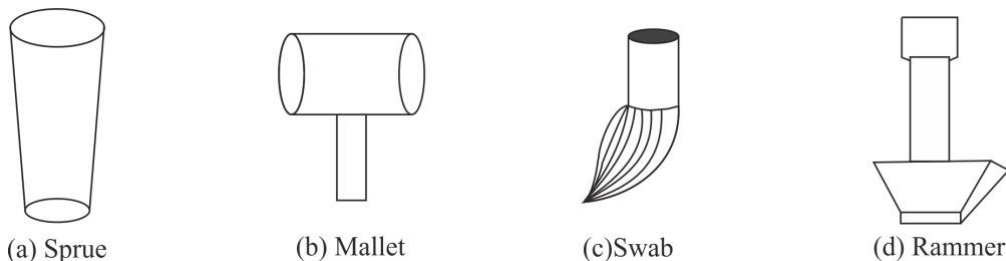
Moulding tools: sprue; mallet; swab and rammer
